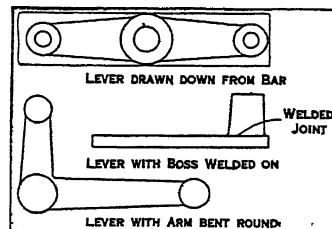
EXAMPLES OF FORGINGS REQUIRING DRAWING-DOWN, WELDING AND BENDING
